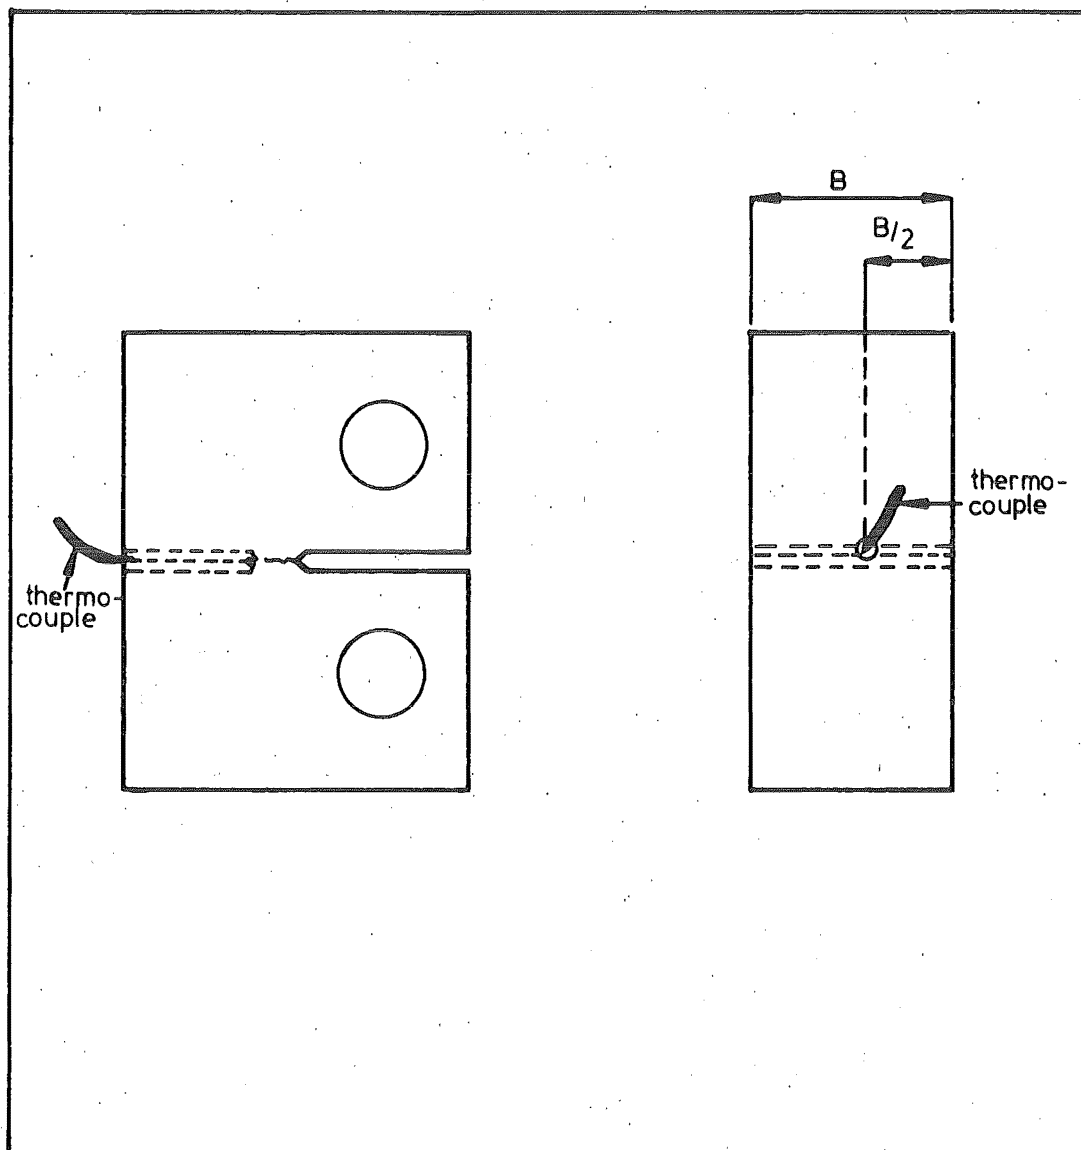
MOUNTING OF CR-CRAI THERMOCOUPLE
